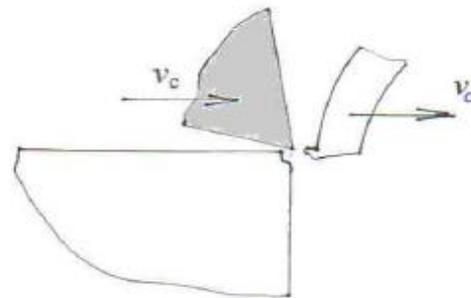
Creation of the imprint of the cutting wedge on the chip during interrupted cut.
